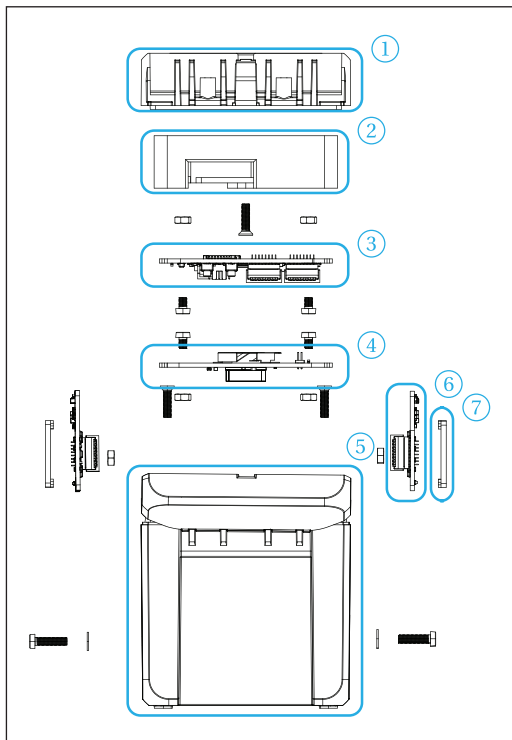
Exploded disassembly schematic of Kleinvoet construction, showing: ①: Enclosure lid, ②: 3D-printed main board adaptor, ③: Main PCB, ④: GNSS PCB, ⑤: Enclosure base, ⑥: Microphone sensor PCB and ⑦: 3D-printed sensor spacer.
